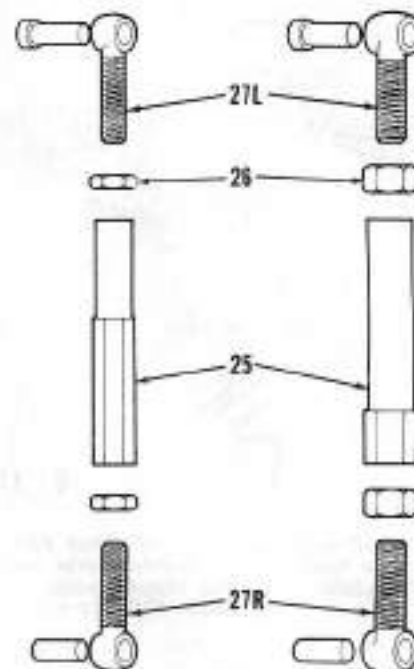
Views showing "old type" and "new type" PTO clutch linkage turnbuckle, eye bolts and lock nuts. Parts are interchangeable in complete sets of three only as different weight of old and new units would throw clutch out of balance if only one unit was renewed with different type. Refer to Fig. 98 for legend.
